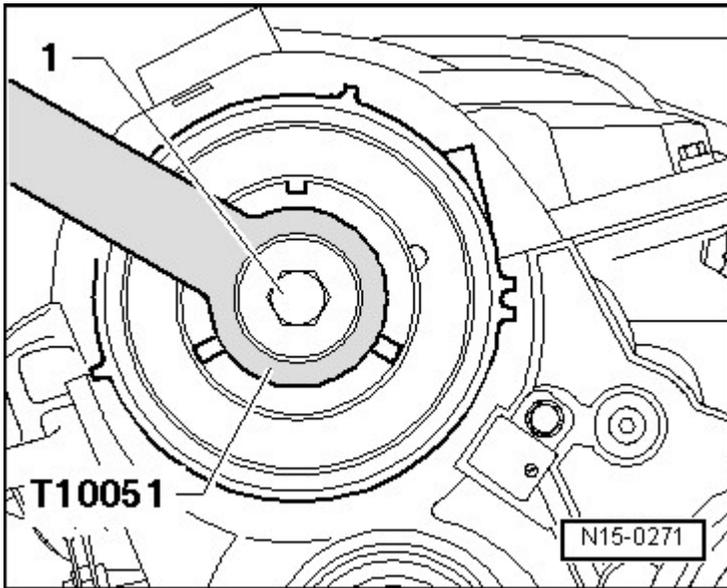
Identifying Camshaft Gear Counter-Hold T10051
